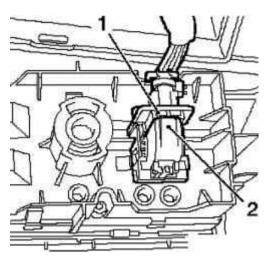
Removing the wiring harness connector module light switch: 1 - secondary fuse, 2 - fuse
